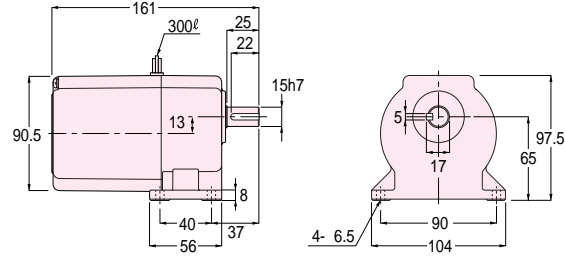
LG -12_B^M-3 ~ 120-S25
